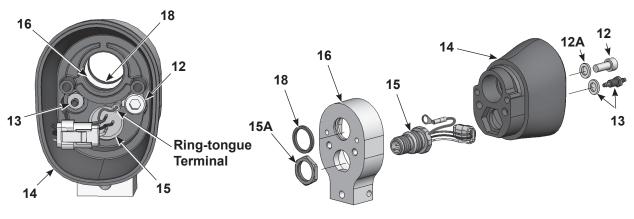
Bar-Mount Gun Disassembly 3 of 3
